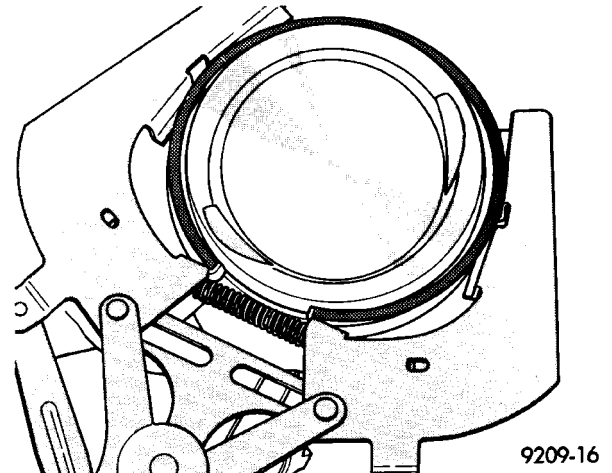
PISTON RINGS - REMOVAL/INSTALLATION
